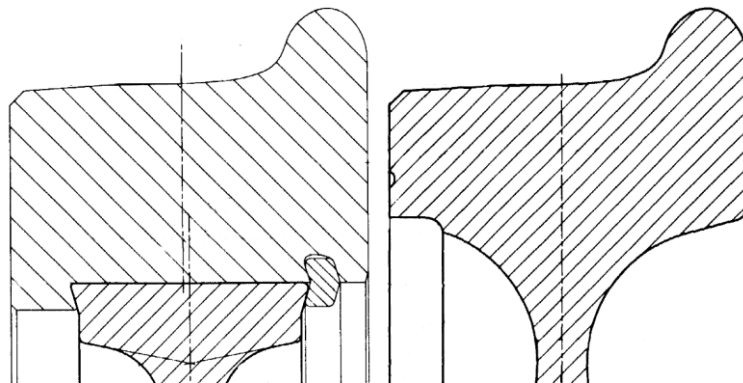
Drawings of a tyred (420 kg, left) and monobloc (340 kg, right) wheel with the same external diameter of 940 mm.
